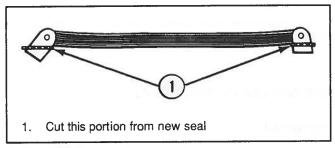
Oil-Pan-Front-Seal Modification (Without Oil Pan Removed)
